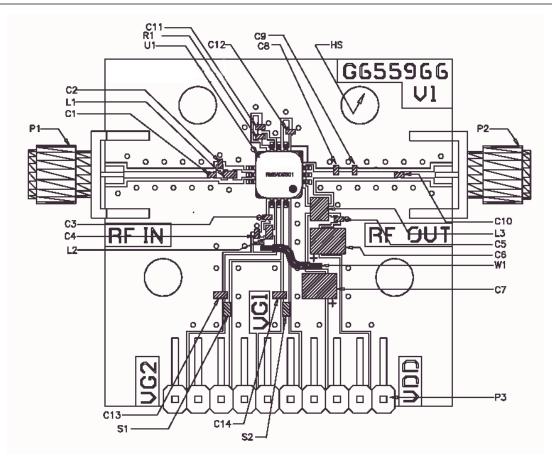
Layout of Test Evaluation Board (RMBA09501-TD, G657471)
